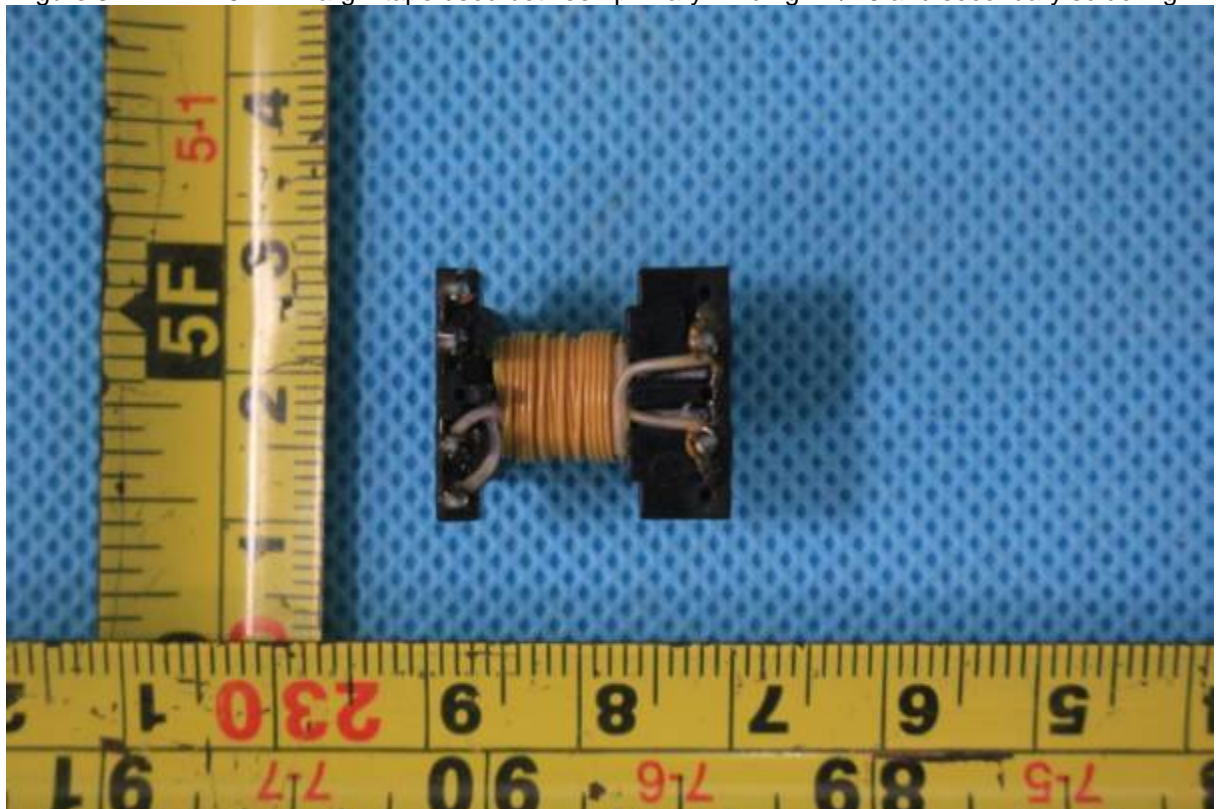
Tube use between primary winding and secondary TIW where can contact at 45-90 angle
